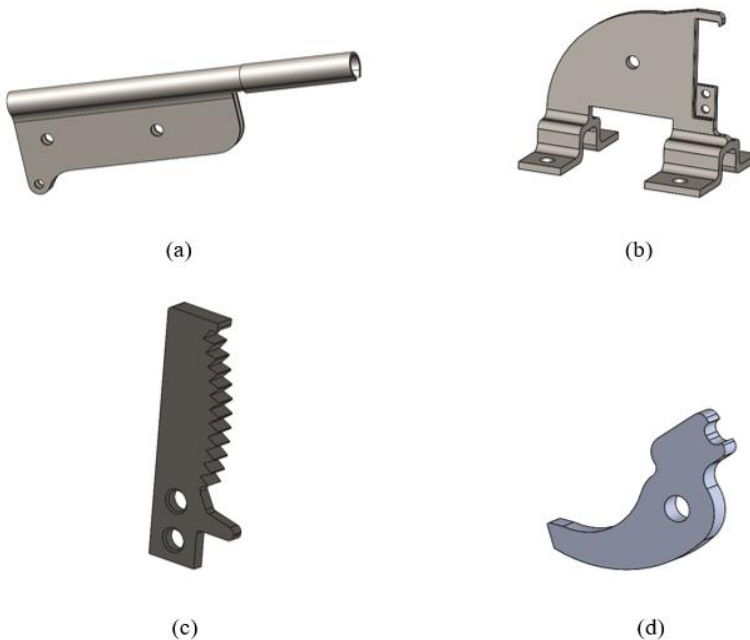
Original handbrake design parts, (a) Main rod, (b) Elliptical gear lock (c) Tooth set (d) Lock trigger
